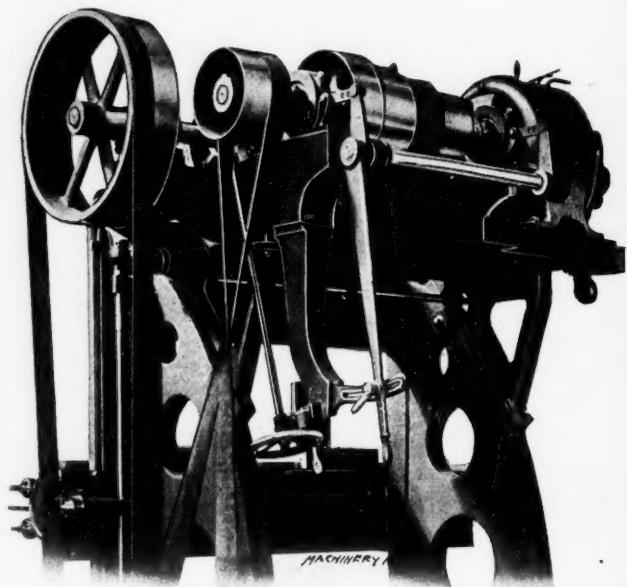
Rear View of Housings, surmounted by Variable Speed Device.
